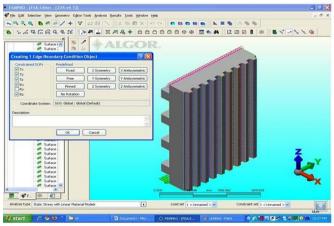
Showing Stiffened Swing Jaw Plate Boundary Condition (Toggle Force).
